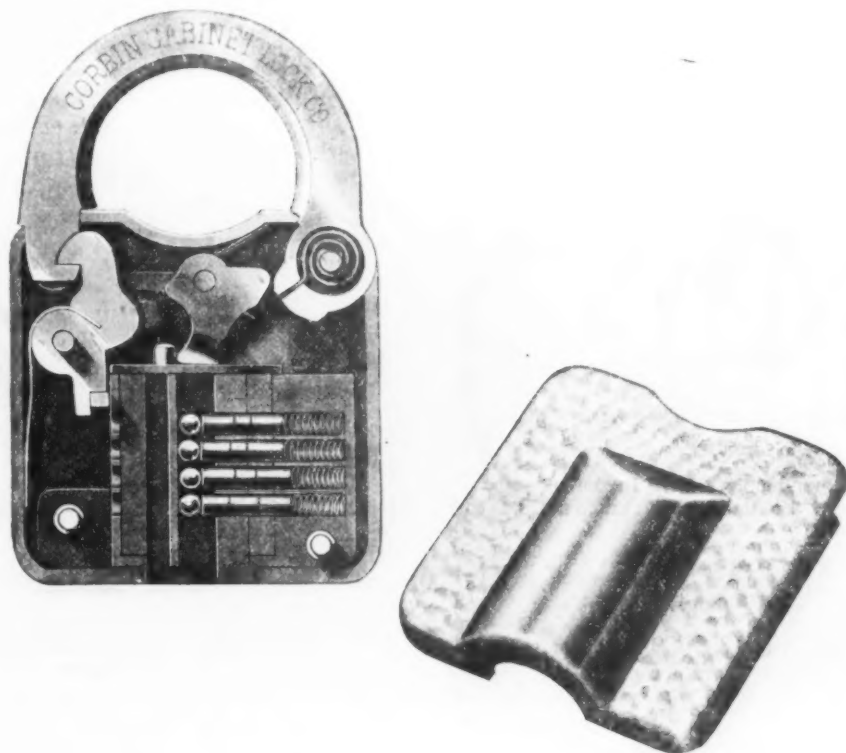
Master Keyed Padlock, Showing Pins in Position.
